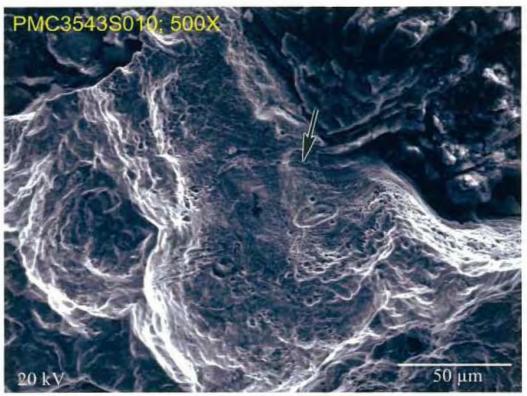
S.E.M photo of eye bar fracture surface at fracture origin, in fig. 45. 500X.
